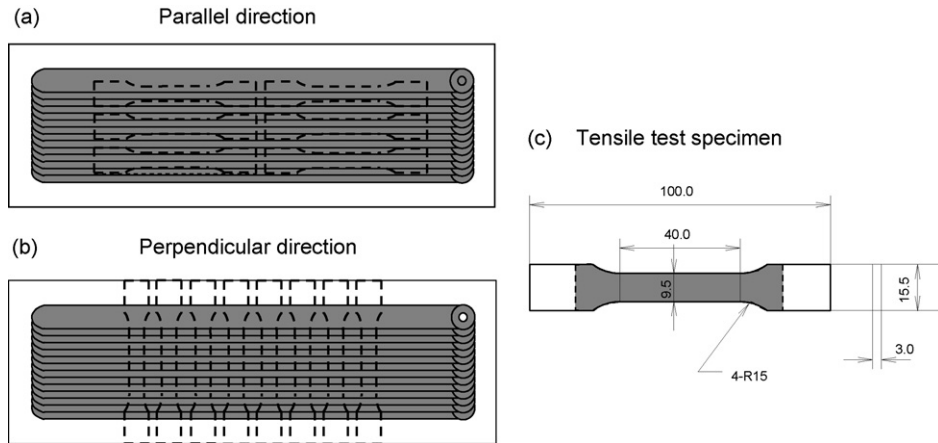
Cutting direction and dimension of the tensile test specimens of MP-FSP samples.
